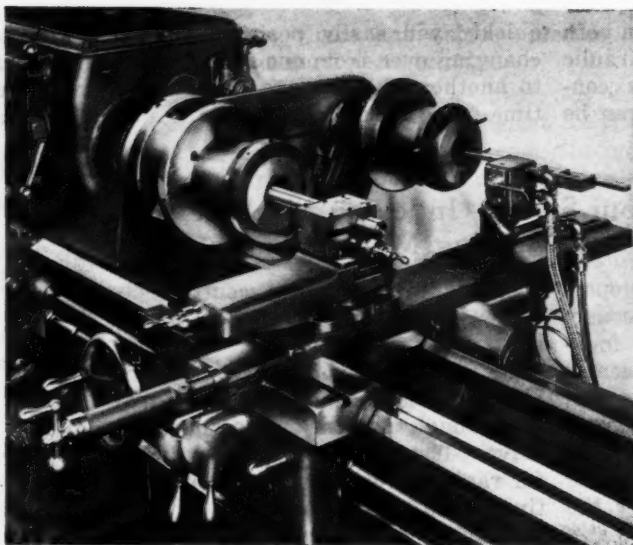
Springfield Hydraulic Profiling Machine Set up for Duplicating Bottle Mold, Using Original Mold as a Master
